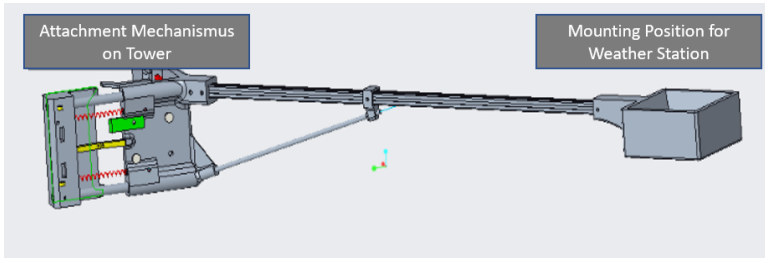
The cantilever consists of two main components: the attachment part and the sensor mounting holder.
